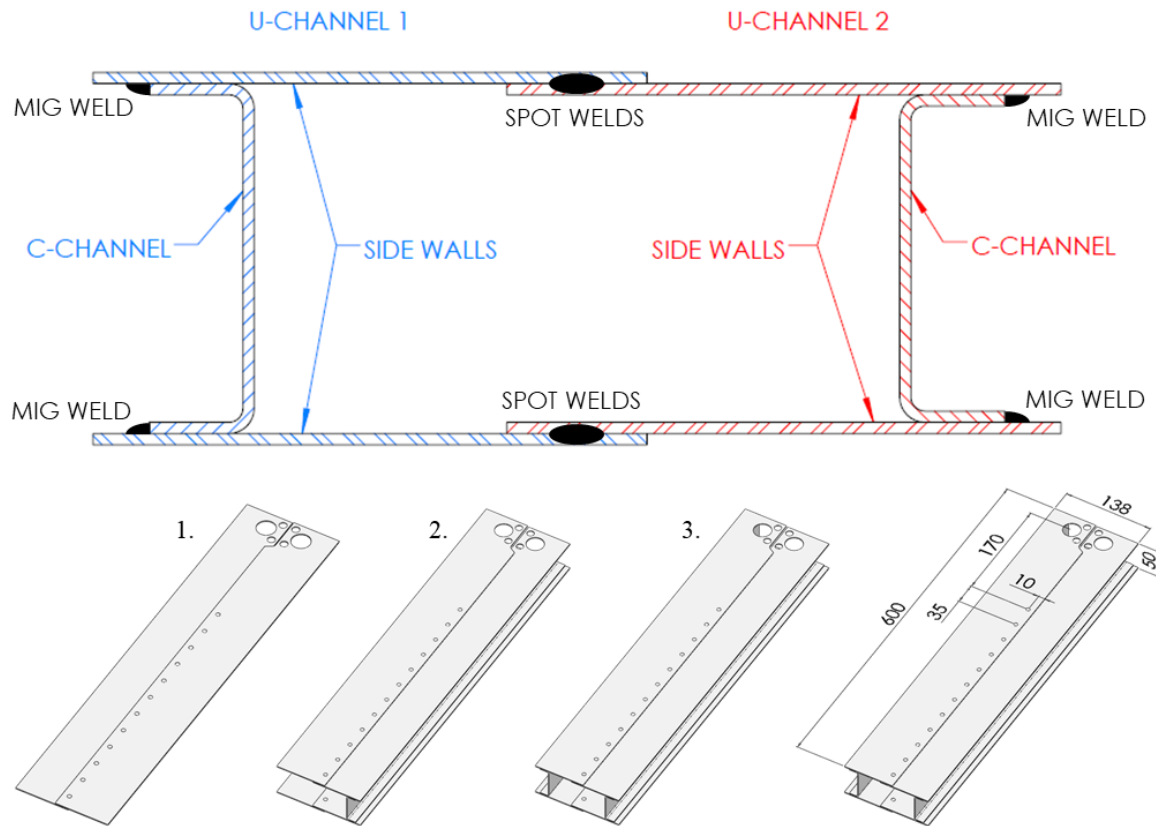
Top) Custom U-Channel rail components. Bottom) Three step joining operations and final outer dimensions with spot weld spacing.
